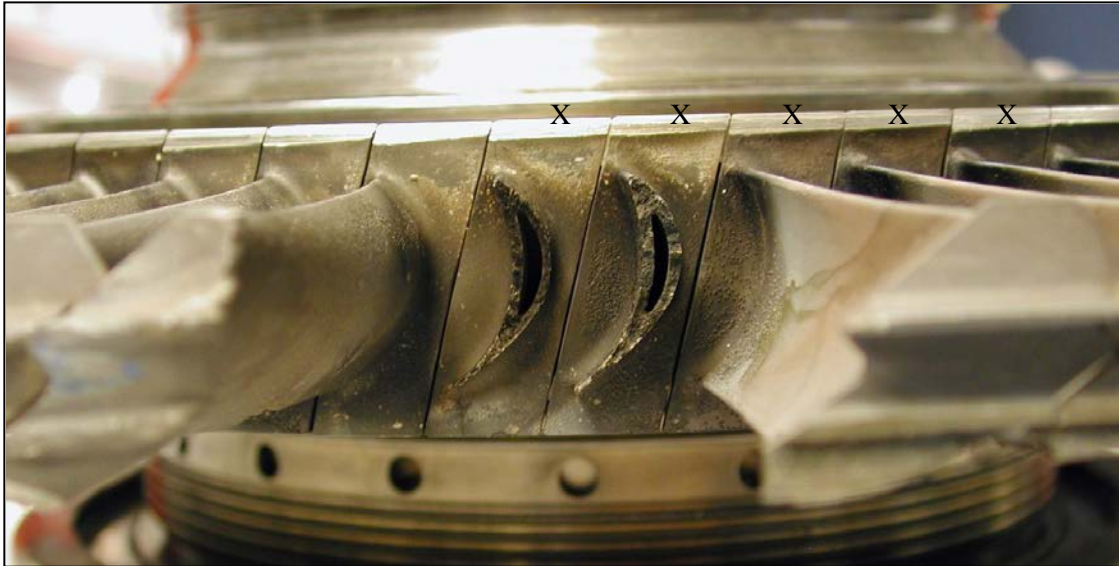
A closer view of the fractured blades. The five (5) blades marked with X were removed from the disc for a closer investigation.
